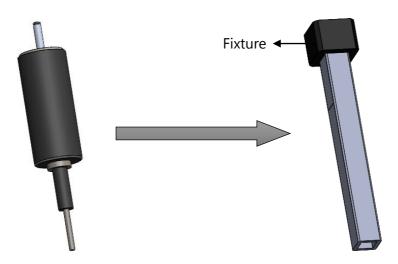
Aluminum square tube equivalent to the spindle.
